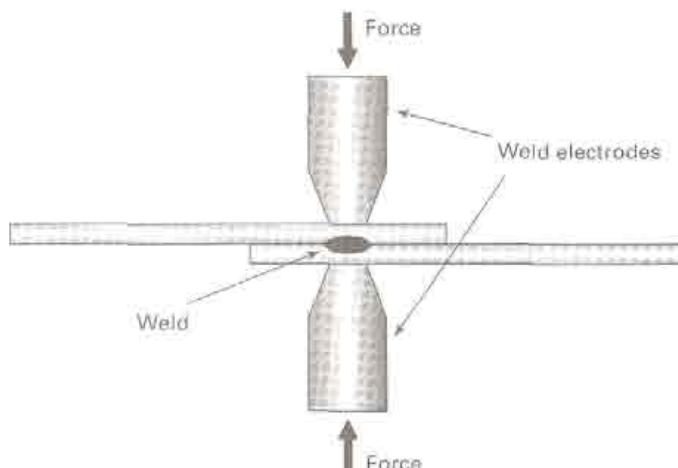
The arrangement of the electrodes and workpieces in resistance spot welding.
